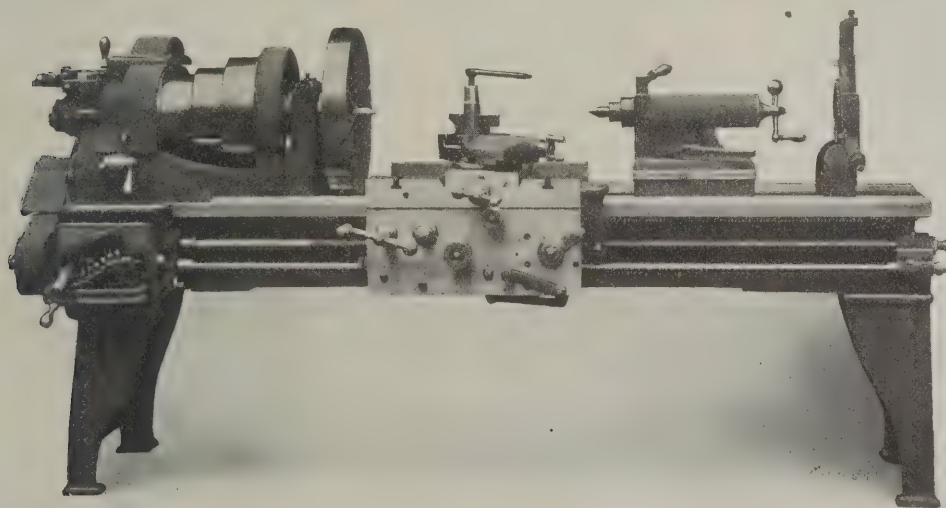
Bradford 18-inch Lathe with Friction Double Back-gears
